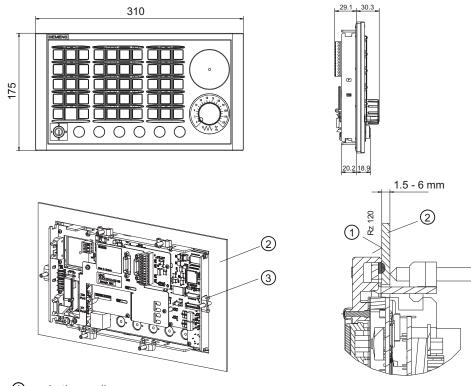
Panel cut-out for the machine control panel MCP 310C PN
